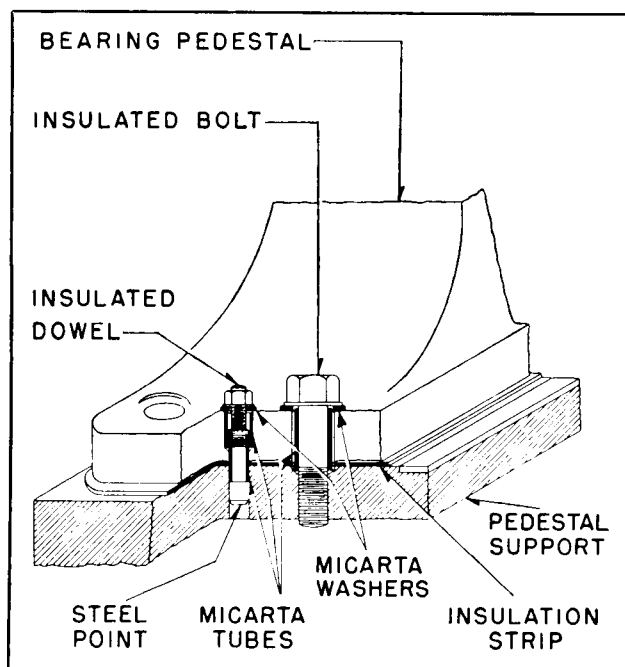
Method of Insulating Bearing Pedestal from Bedplate
